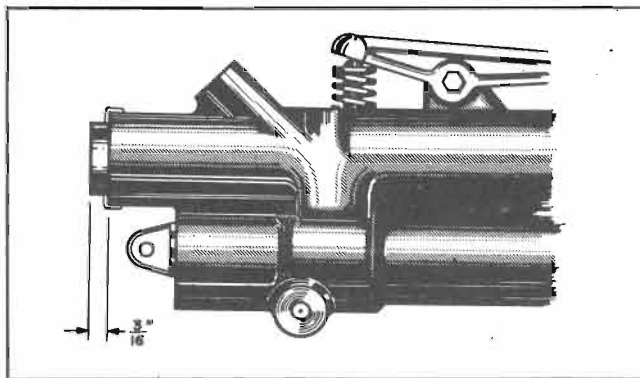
Master Brake Cylinder Expansion Chamber Adjustment Plug
